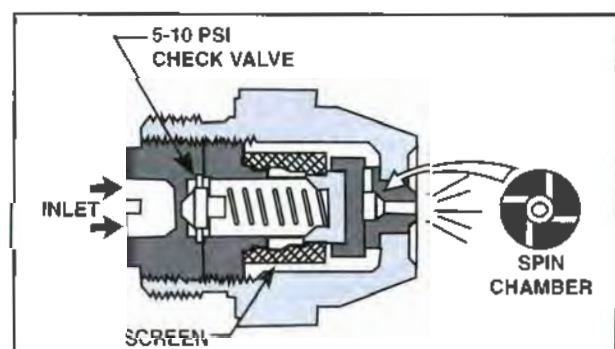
A Simplex nozzle provides a single spray pattern and incorporates an internally fluted spin chamber and a check valve. A Simplex nozzle is typically mounted inside an engine and can be accessed only when a combustor is removed.
